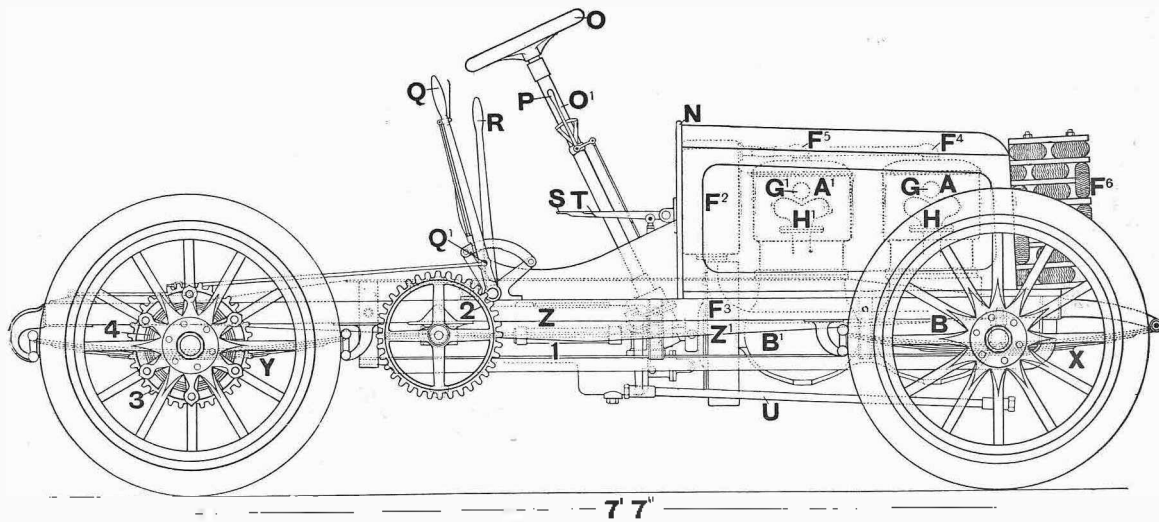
Side elevation of the 16 h.p. De Dietrich chassis.
